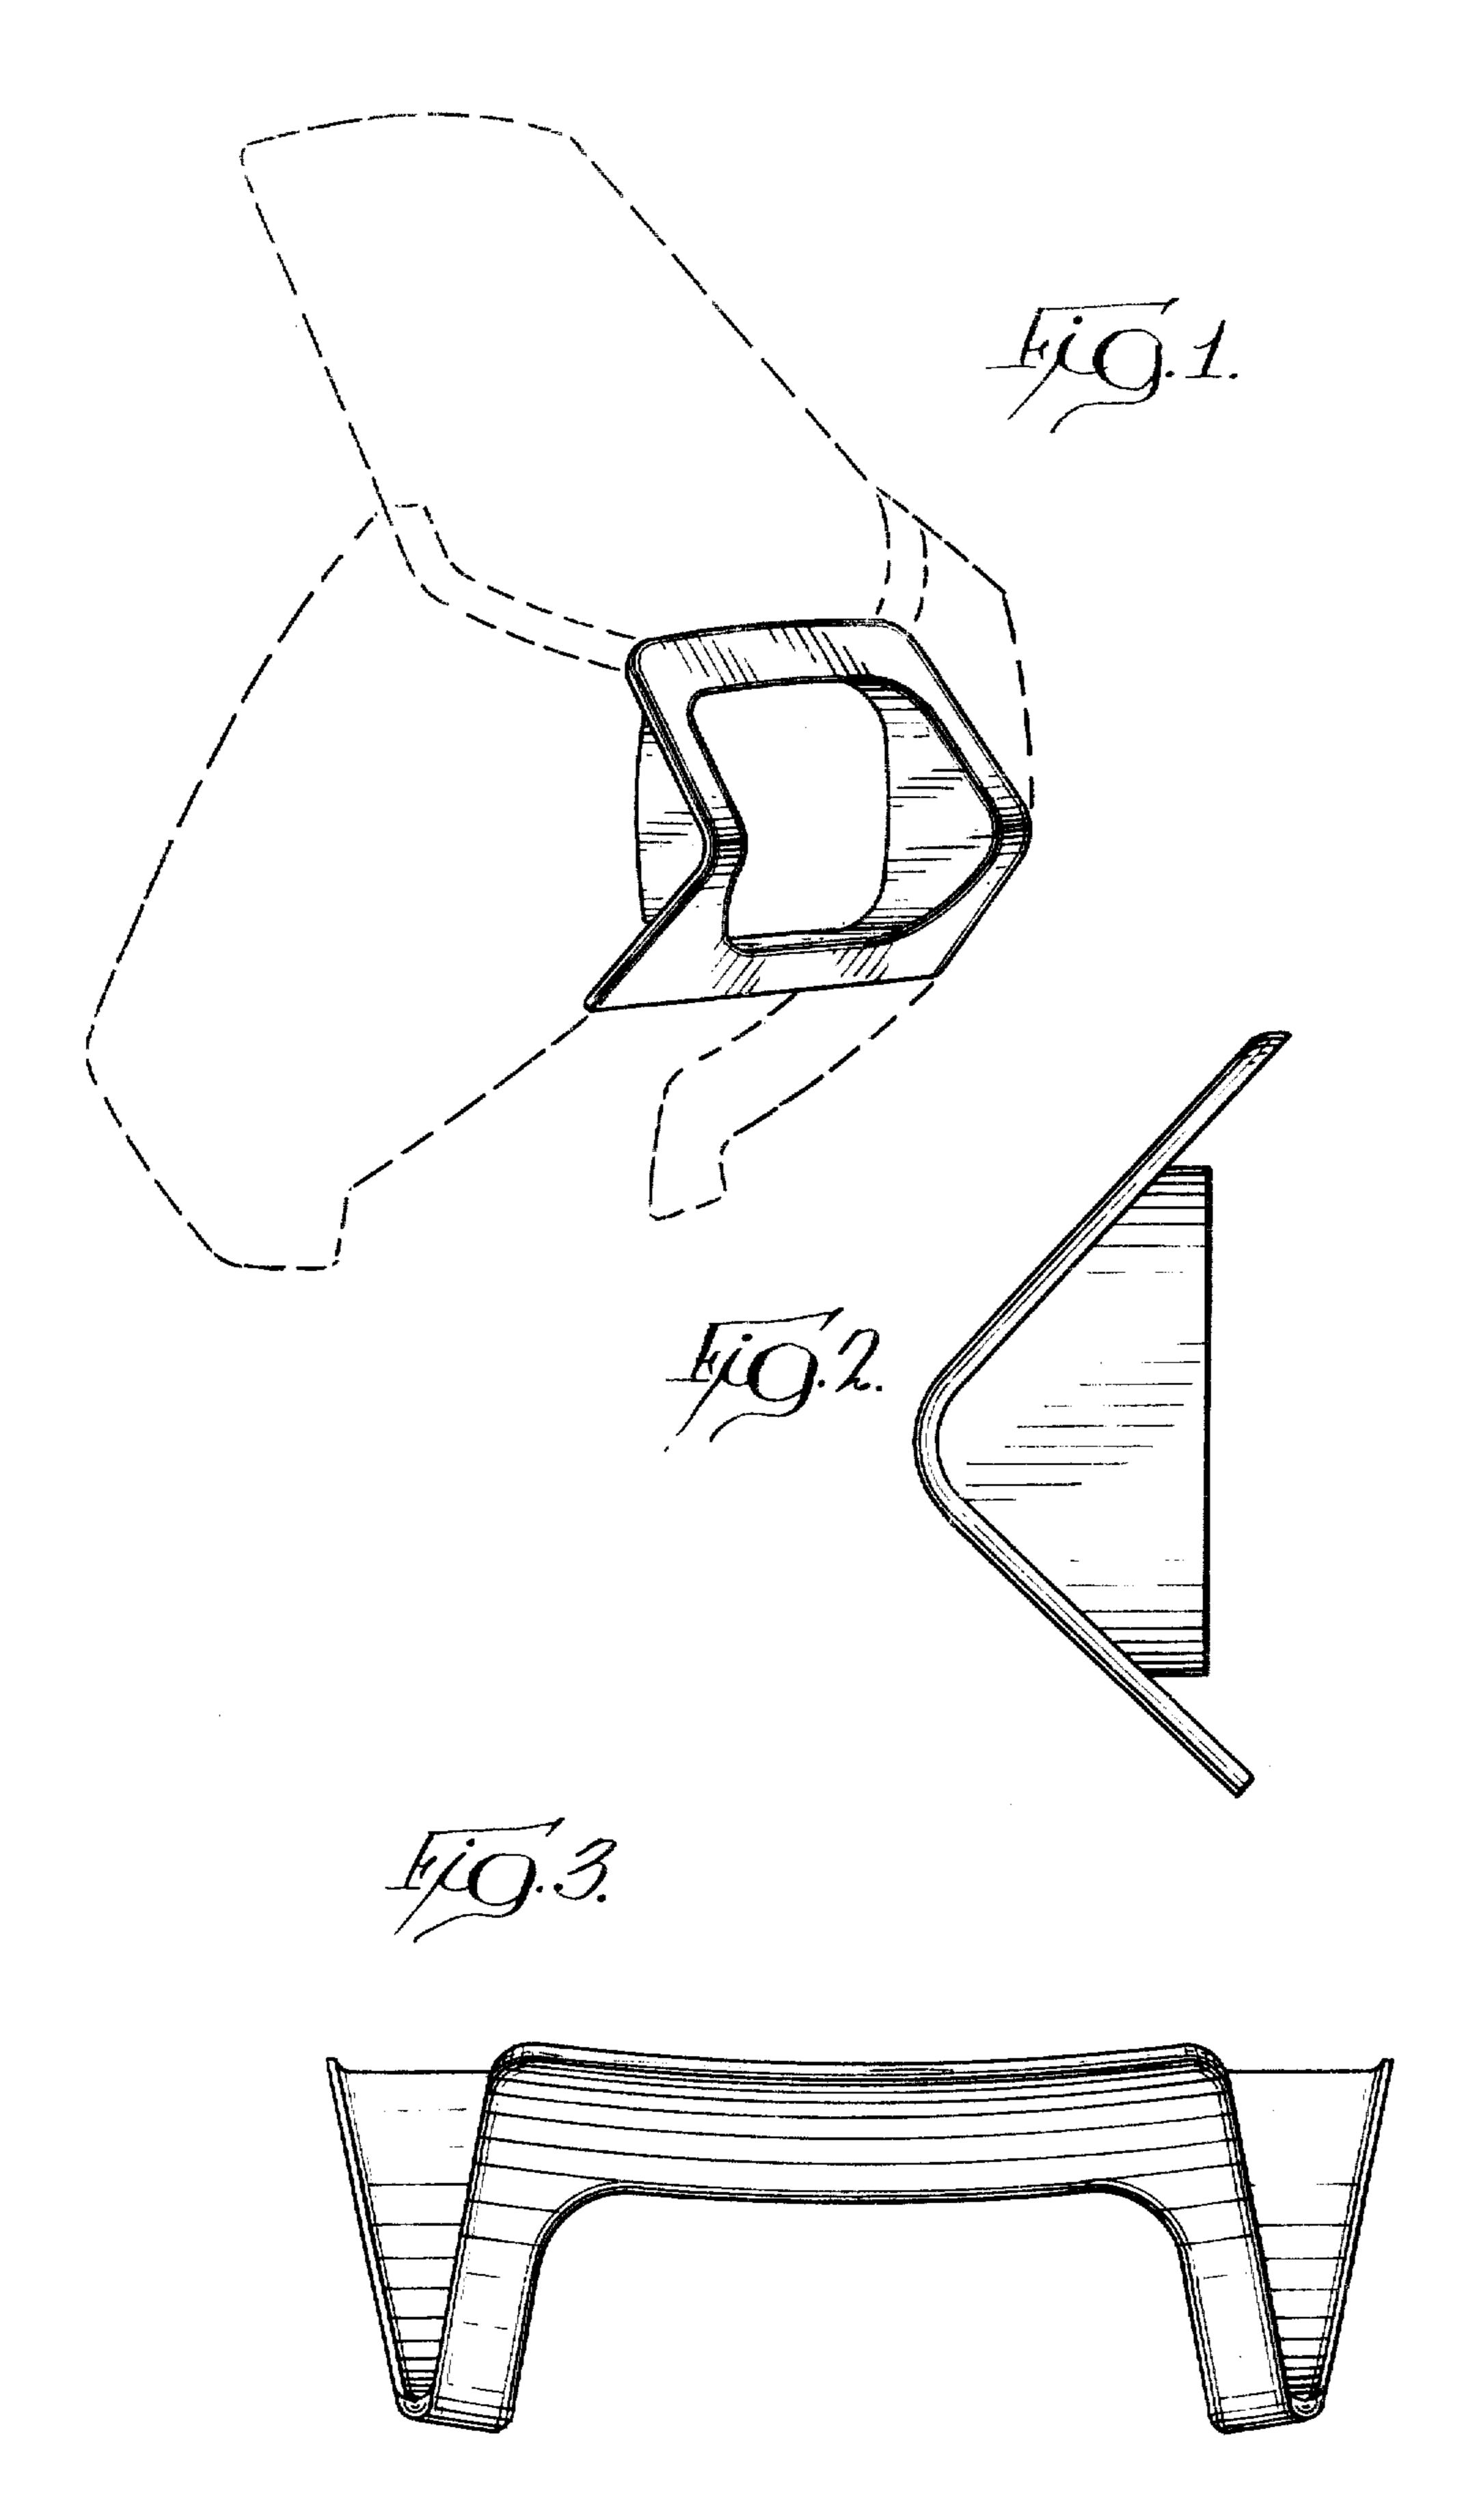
is a left front perspective view of a headlight bezel for motorcycle fairing showing the new design; FIG. 2 is a right side elevational view thereof on an enlarged scale;
